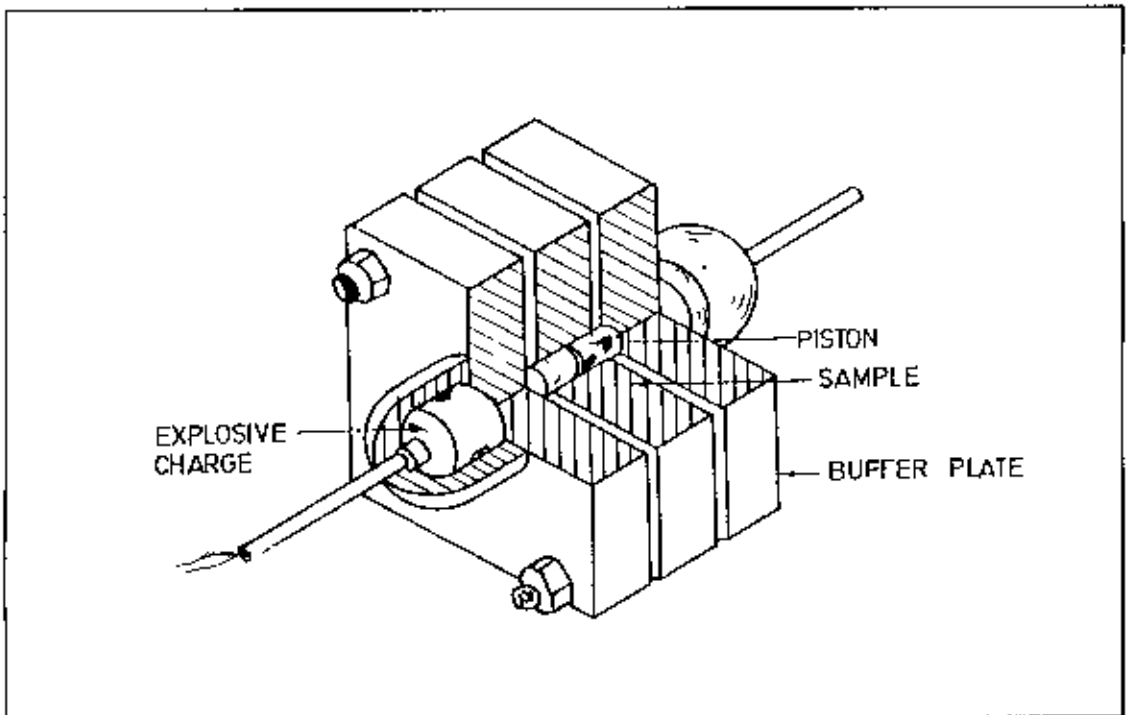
(b) Design of double acting explosive press for compressing powder.
